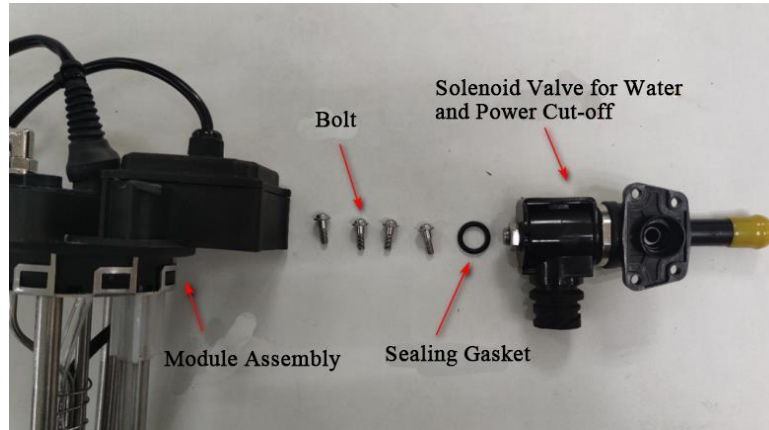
Assembly Diagram of Components for Water and Power Cut-off Solenoid Valve
